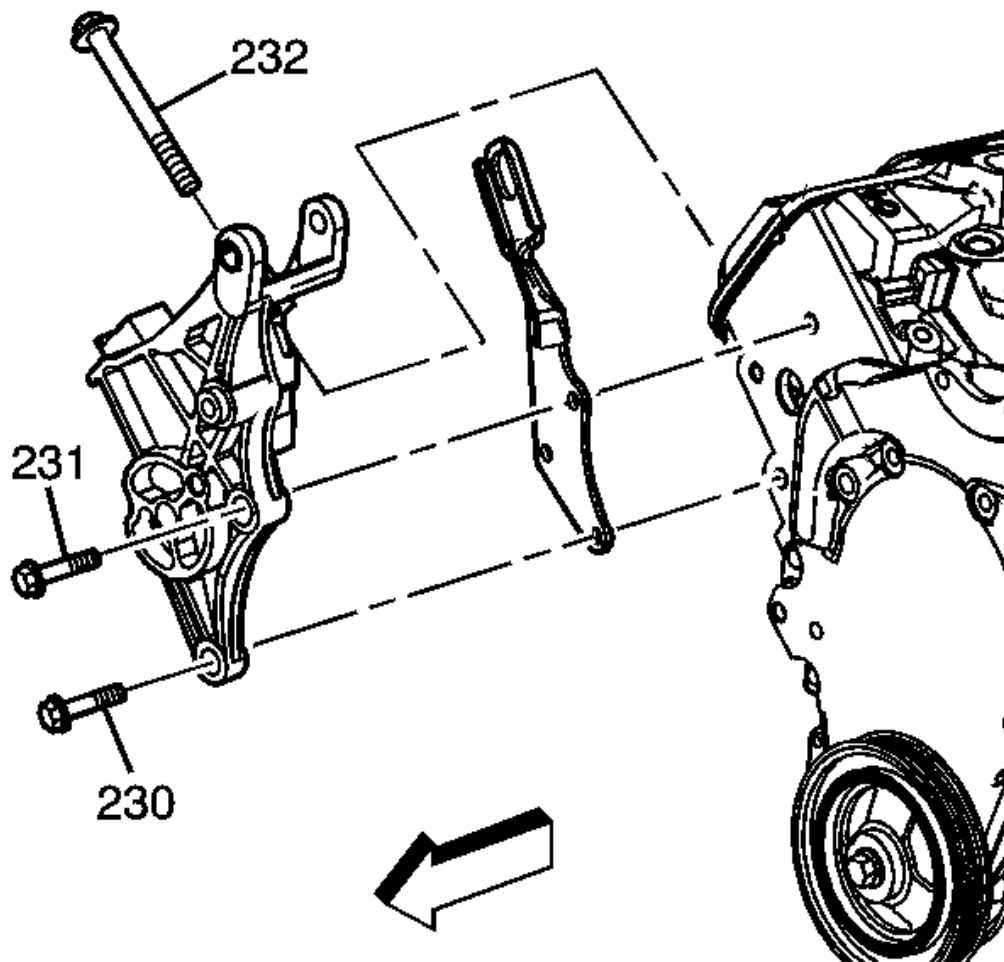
View Of Generator Bracket Assembly Bolts (230, 231, 232)
